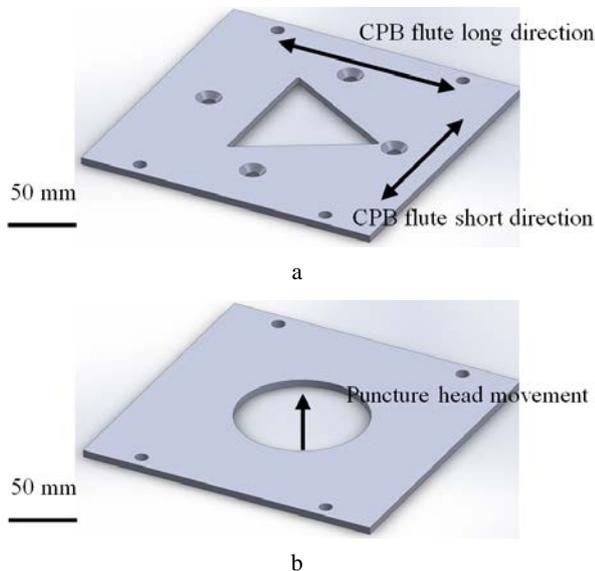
Fixing plates of corrugated paperboard: a – the upper clamping plate; b – the bottom clamping plate (puncture starts at the bottom)
